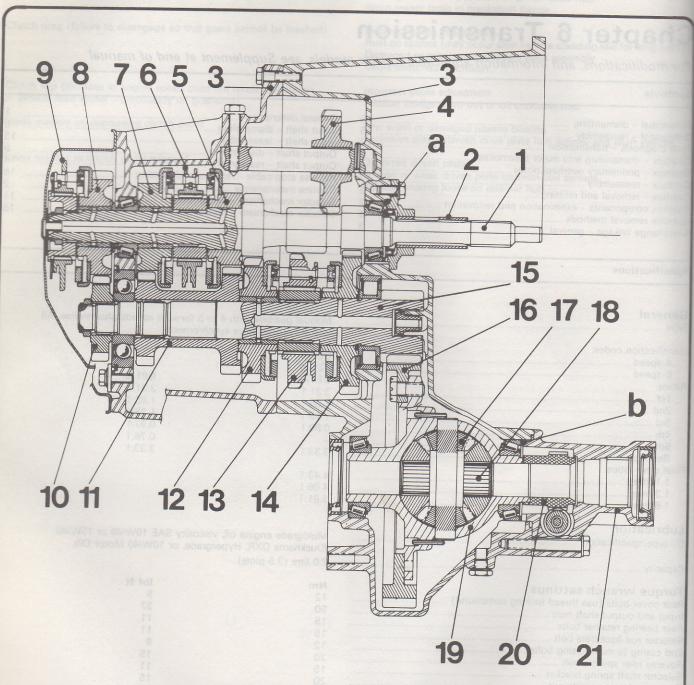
Sectional view of the BE1/5 transmission (Sec 1)
